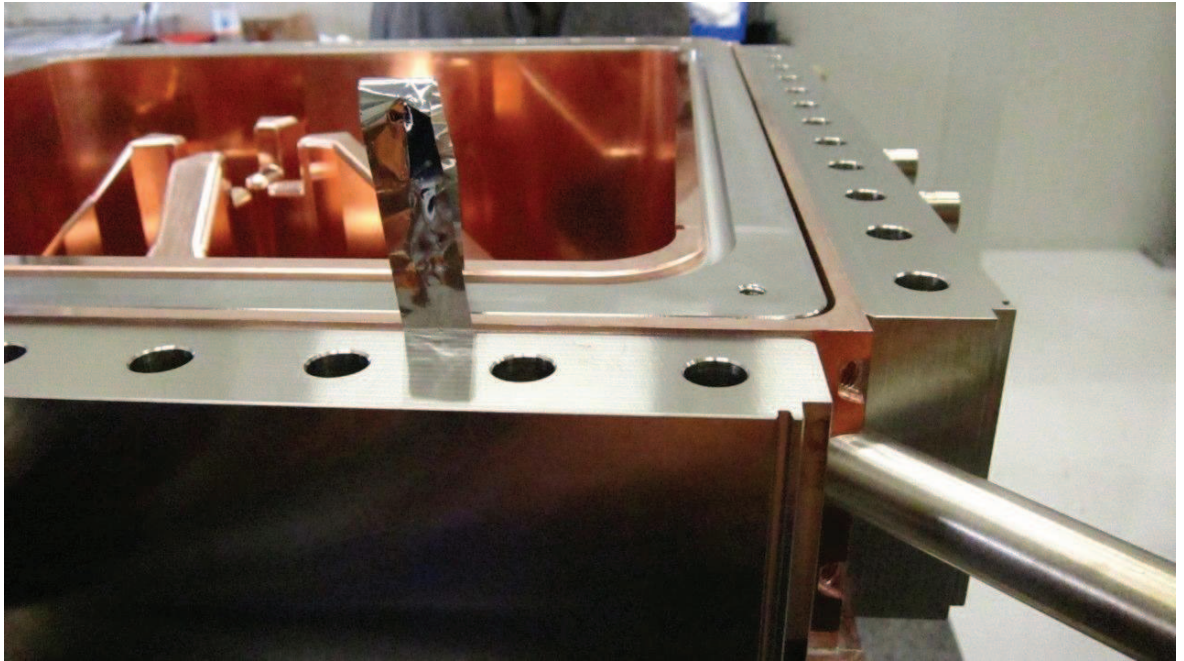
Poor brazing on one of the flanges at the top. The calibrated tape of 0.01 mm thickness could be inserted on the coupling surfaces for about 15 mm.
